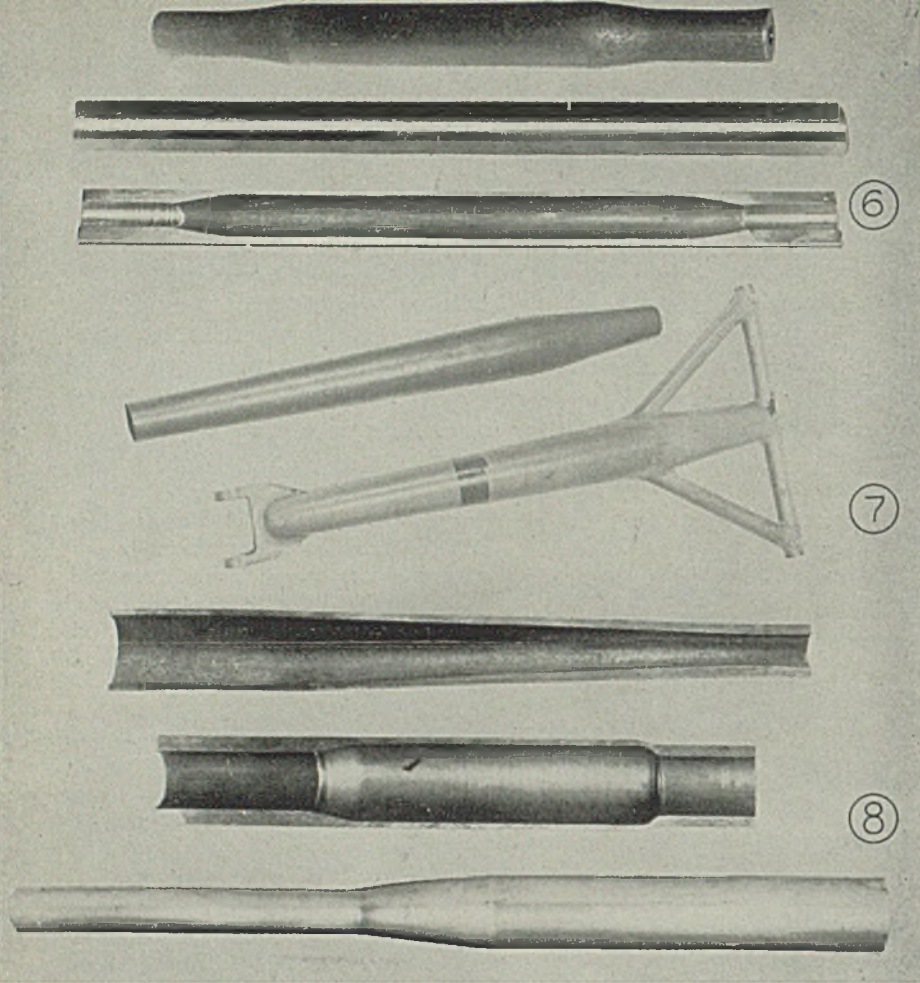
To produce part No. 490, a tube is hot swaged to required inside and finished outside dimension at both ends as shown here at top. Next part is reamed inside of both ends and outside central portion is machined by chucking on the inside dimension. Bottom view is cross section through finished part. It is not possible to produce such a part without machining off excess metal on outside diameter due to extreme difference in wall thicknesses. A light walled tube cannot be hot upset and swaged back at the ends because mass of metal is too small to retain sufficient heat. Metal would fold
